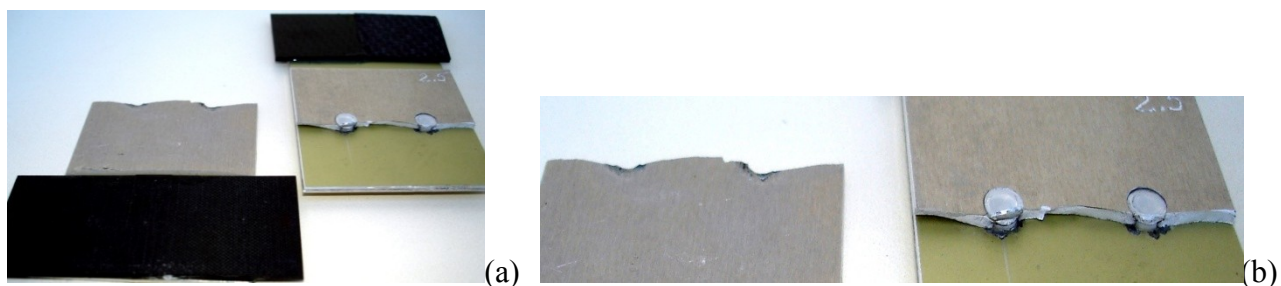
(a) Al-GI joint without previous conditioning fatigue tested by [4]; (b) Magnified view.
